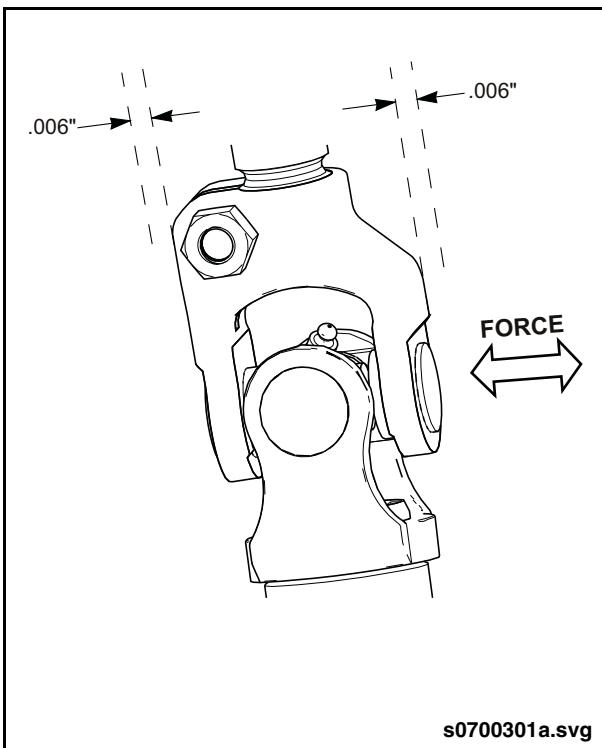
Steering Driveshaft U-Joint Inspection
